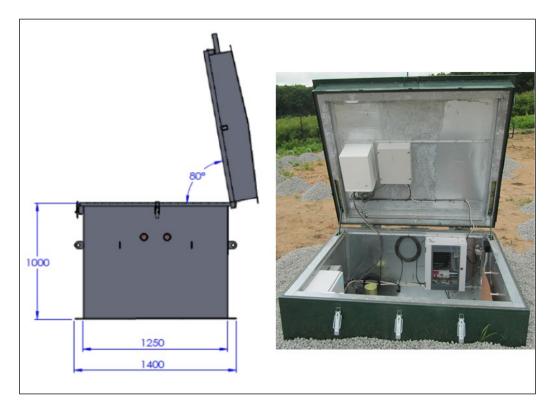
Heavy-duty-stainless-steel Vault for underground and above ground installation
